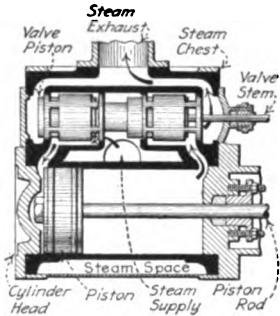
Section of cylinder of a piston-valve engine. (Arrows indicate direction of steam flow.)
